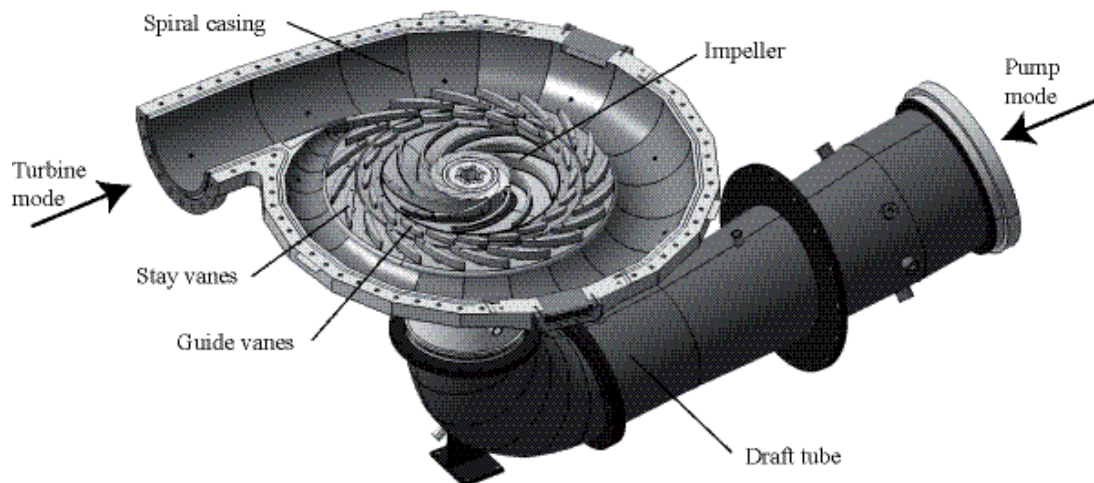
Hydrodyna pump-turbine with spiral casing, stay vanes, guide vanes, runner (impeller) and draft tube, taken from [97].
